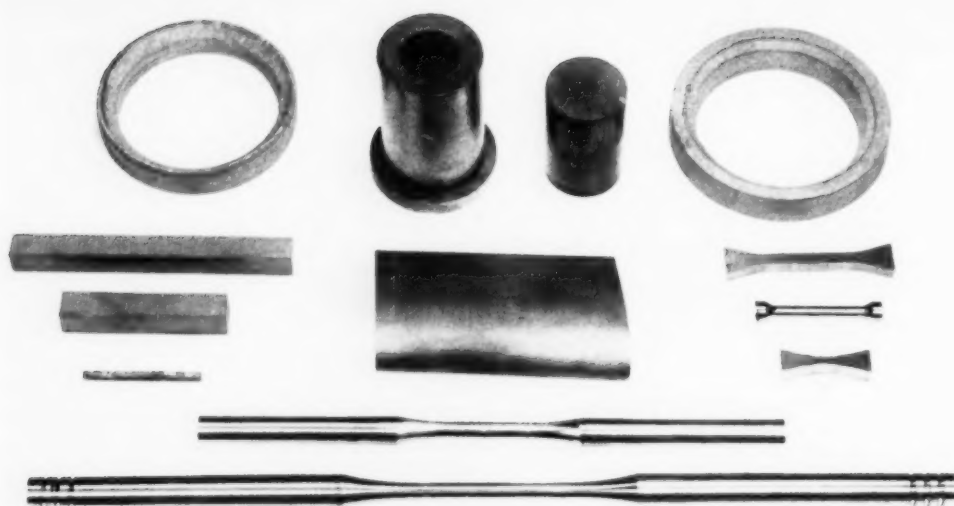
Various Parts and Specimens Made of Titanium Carbide Cermets, Including Intake and Exhaust Valve Rings, Nozzle Vane, a Pump Bearing, Impact Bar, and Tensile and Stress-Rupture Bars
